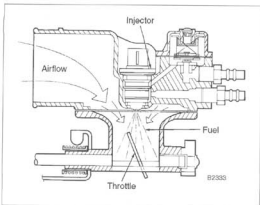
CFI delivers fuel directly above throttle plate, similar to carburetor location. (Low-pressure shown.)
